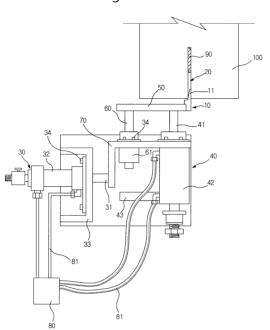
Plan view before cutting groove separation device of metal plate begins operation
